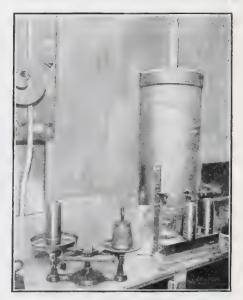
RESIX MELTING FURNACE SHOW ING SHELL FILLING AND WEIGHING ARRANGEMENTS.
